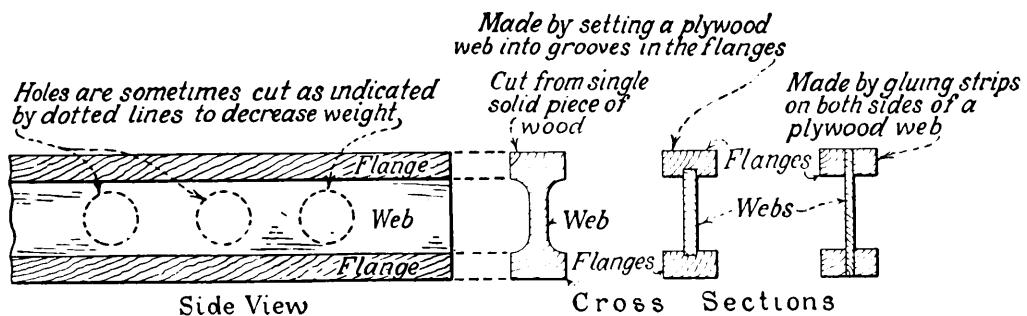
I-beam spar (three methods of construction). These are made of a section of plywood strengthened by cap strips at either edge.
